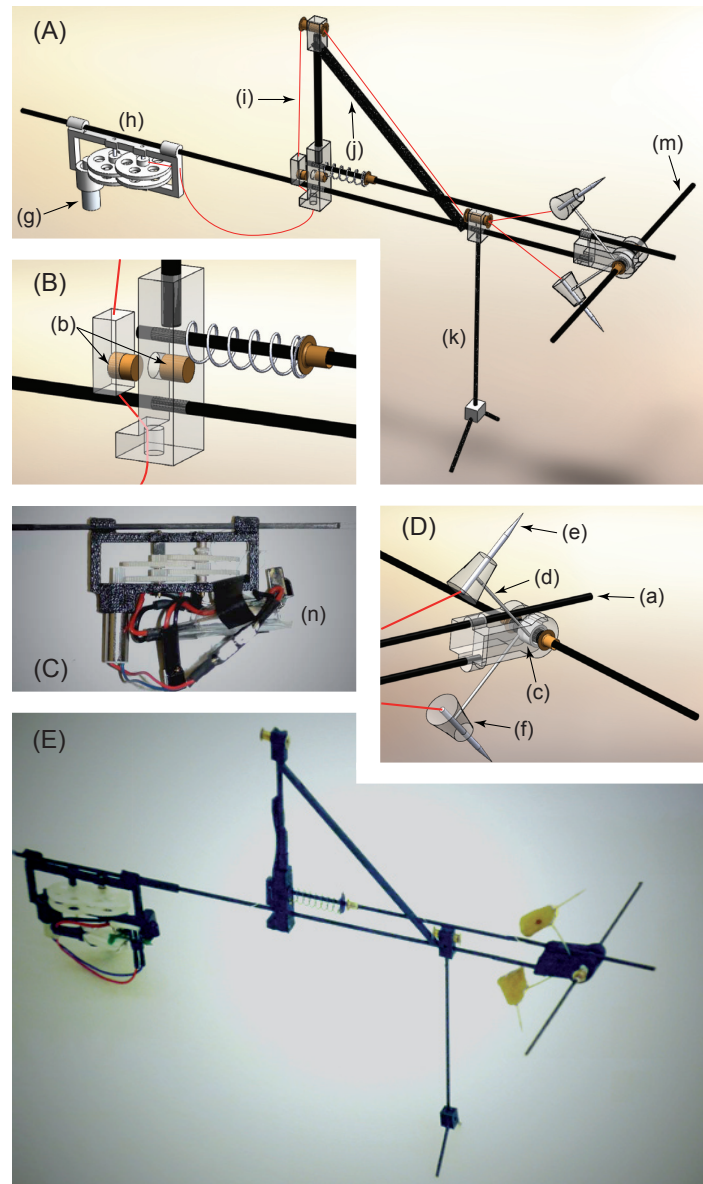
Illustration of the details of the mechanical realization in CAD and on the realized prototype. (A) entire perching mechanism, (B) close up view of the release mechanism where the trigger separates the magnet to allow the arms to snap forward, (C) close up view of the front part of the mechanism, (D) close up photograph of the gearbox (E) photograph of the entire prototype
